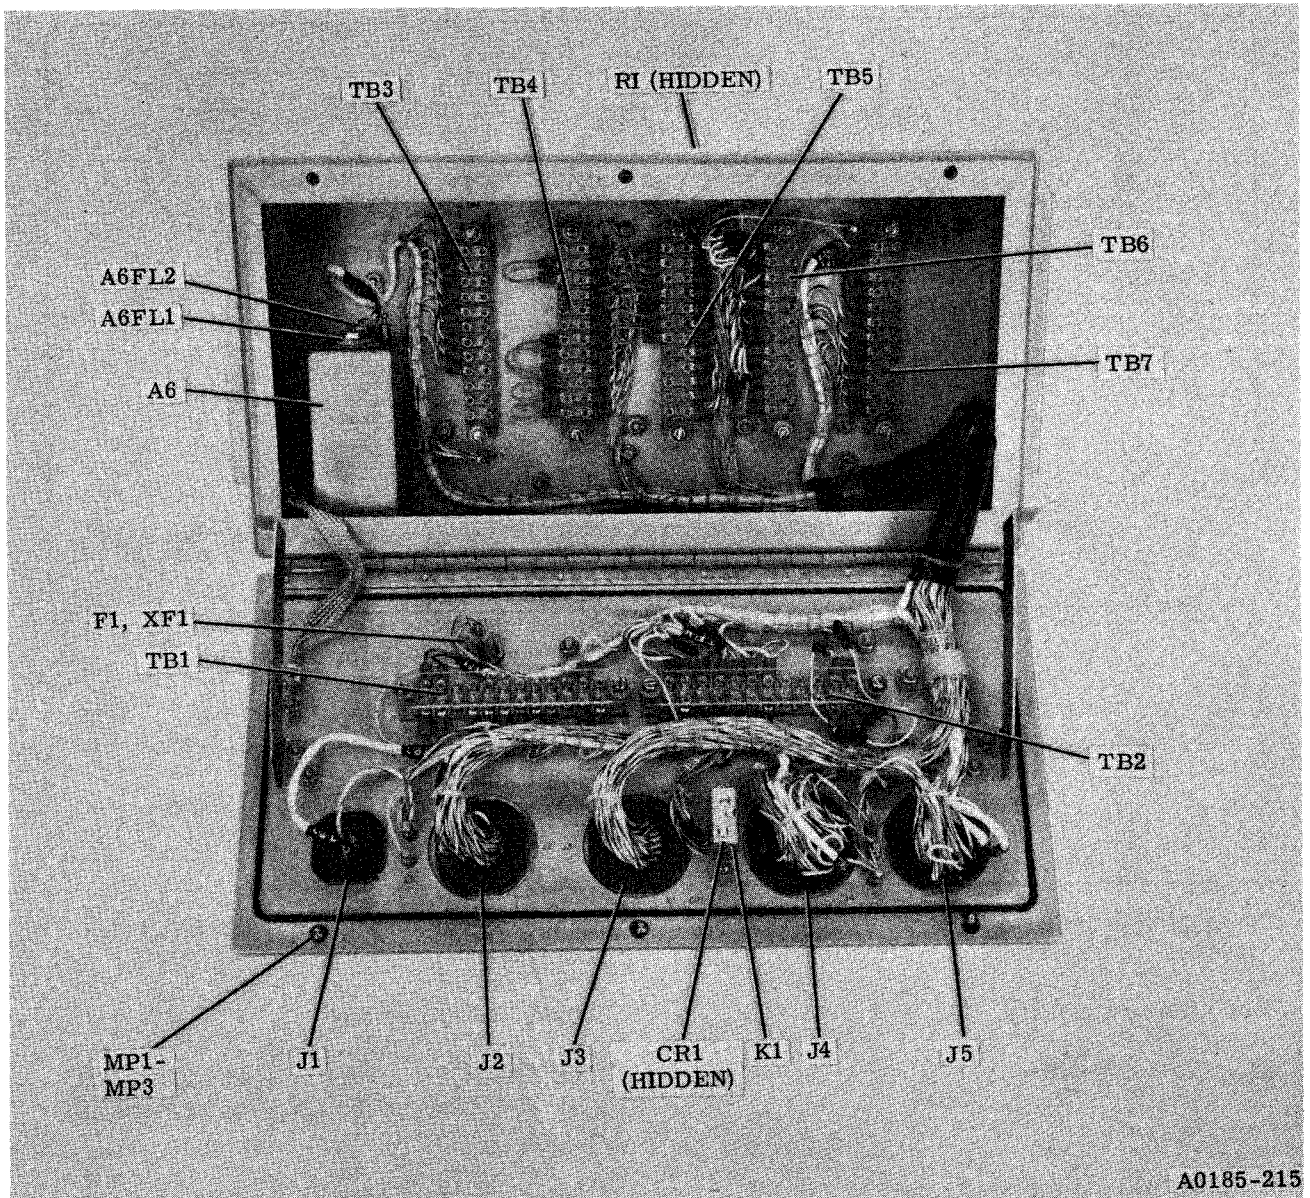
Interconnection Box J-1265/U, Top View, Front Panel Open
